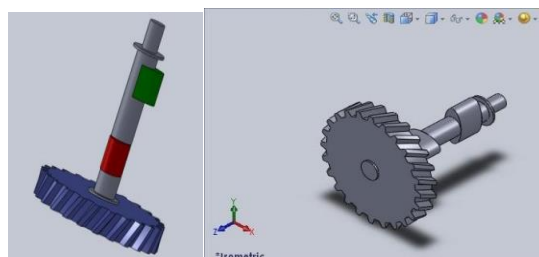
General cam shaft with cam lobe and camshaft gear and Modified camshaft with cam lobe and camshaft gear
